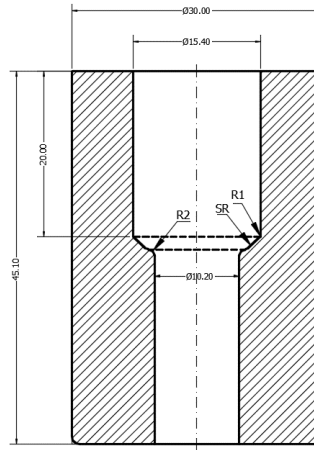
Illustration of the die insert dimension used in injection forging.
